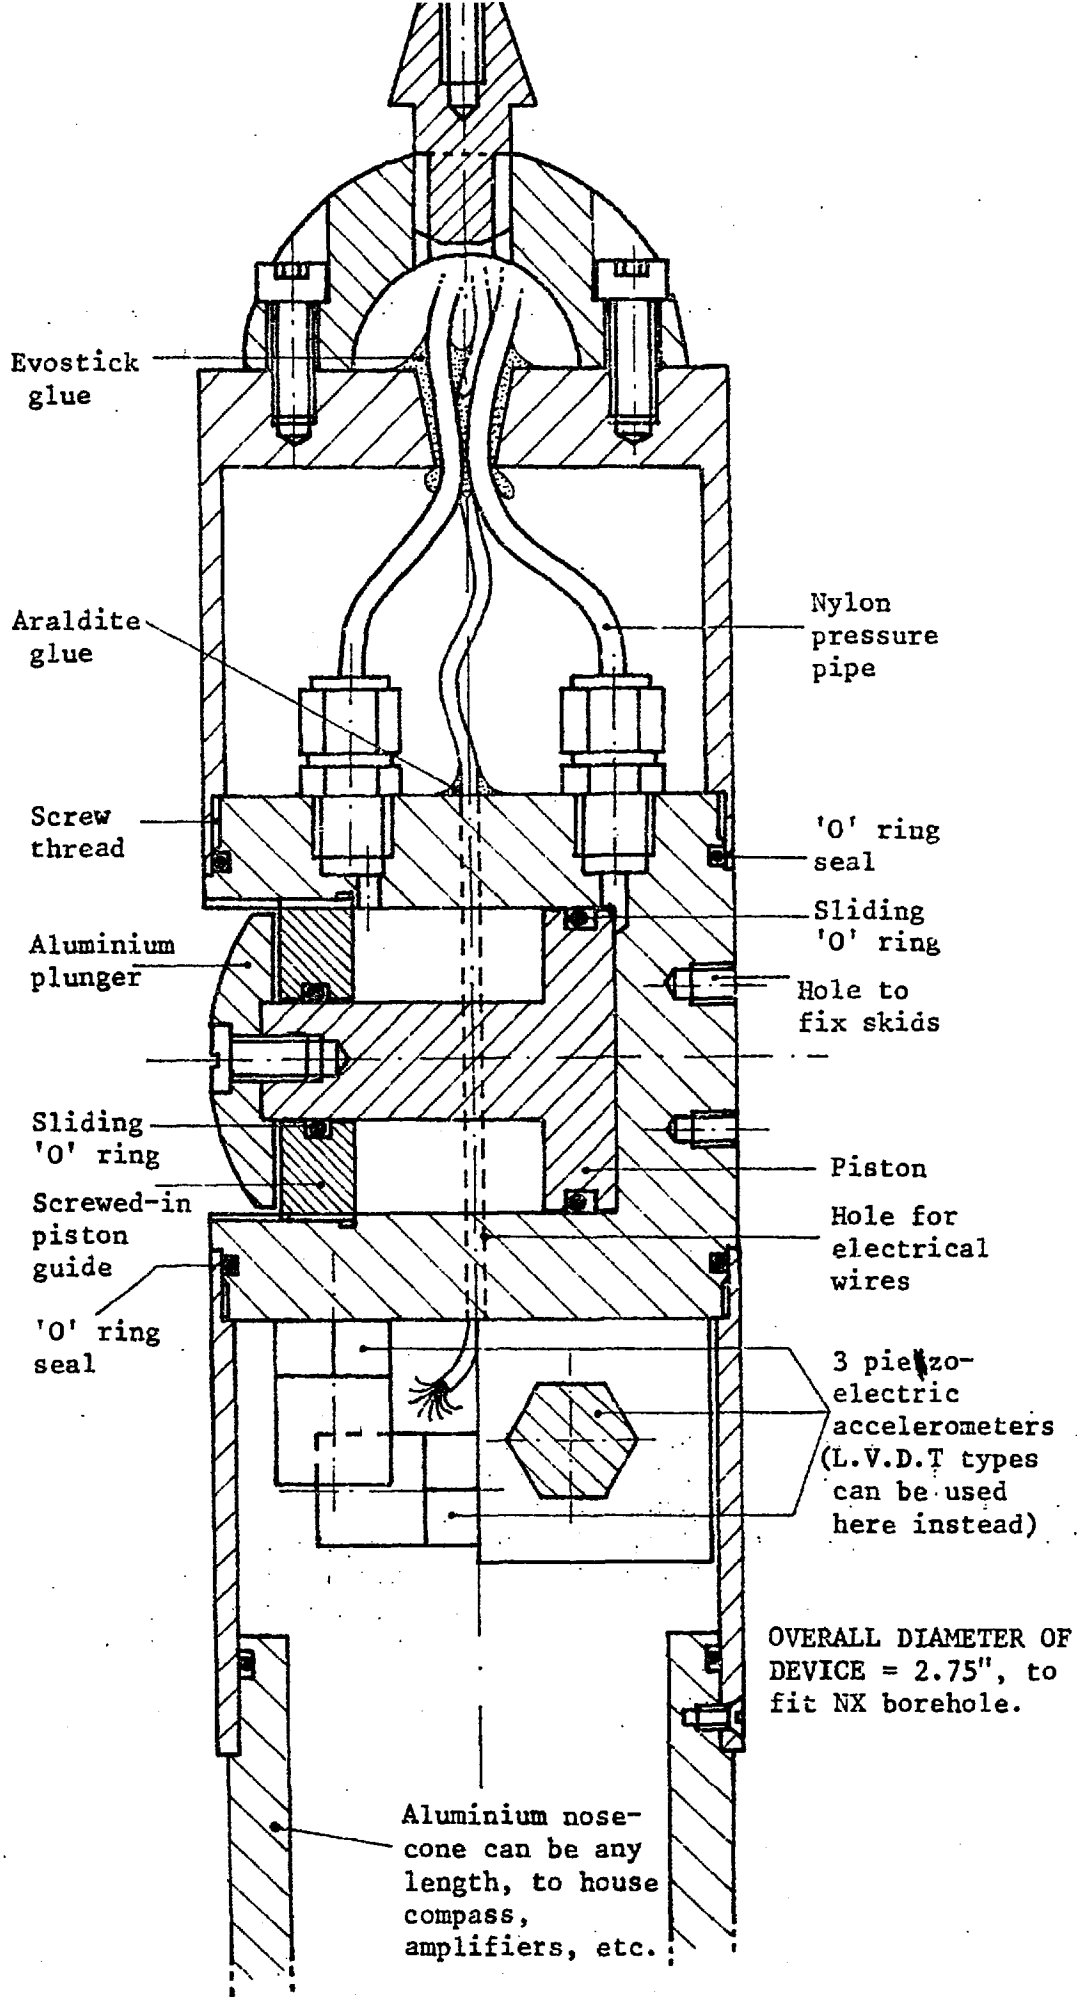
SECTION THROUGH BOREHOLE ACCELEROMETER DEVICE
